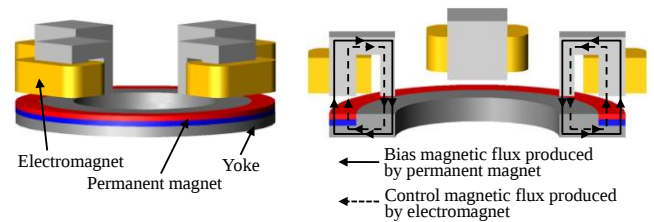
Magnetic bearing of Separated type magnetically levitated motor
